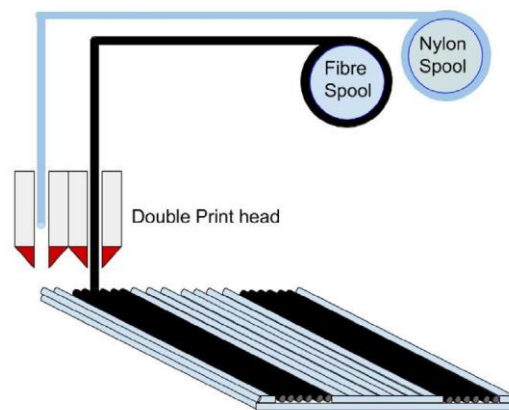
Schematic of the MarkForge 3D printing process using a double print head [82]
